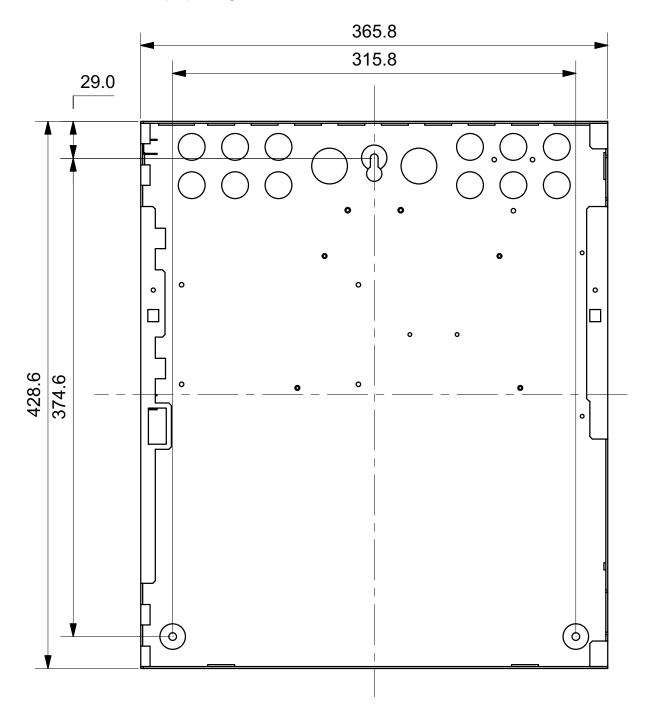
XM3 Back Box Dimensions (mm) Drawing Not to Scale.
